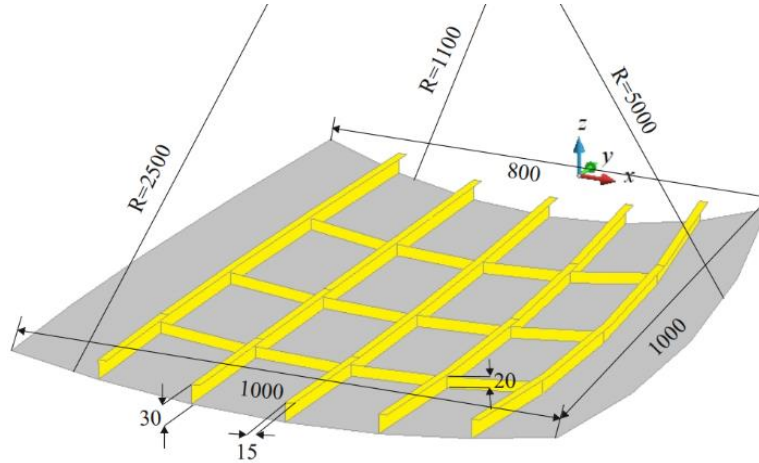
Dimensions of the stiffened multi-layered aft fuselage panel (all in millimeters).
